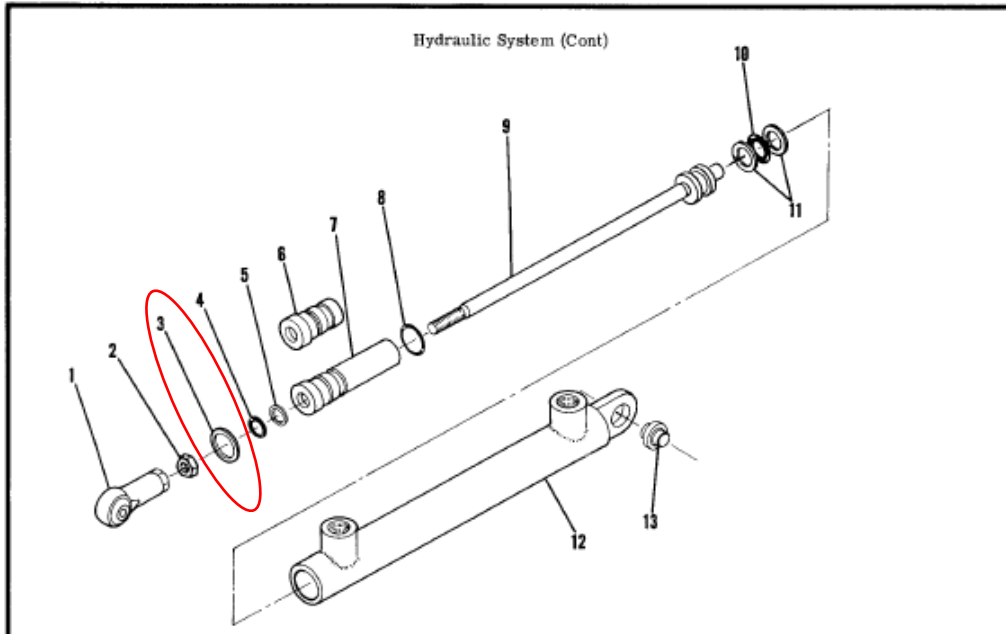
Main Gear Doors & Nose Gear Doors Actuator Assembly
